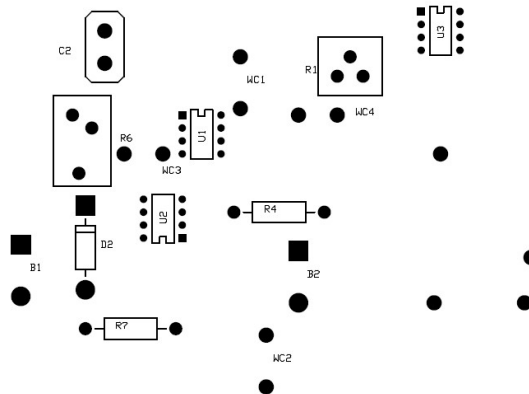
PCB layout (silkscreen, pads and text on top layer) of PWM circuit
